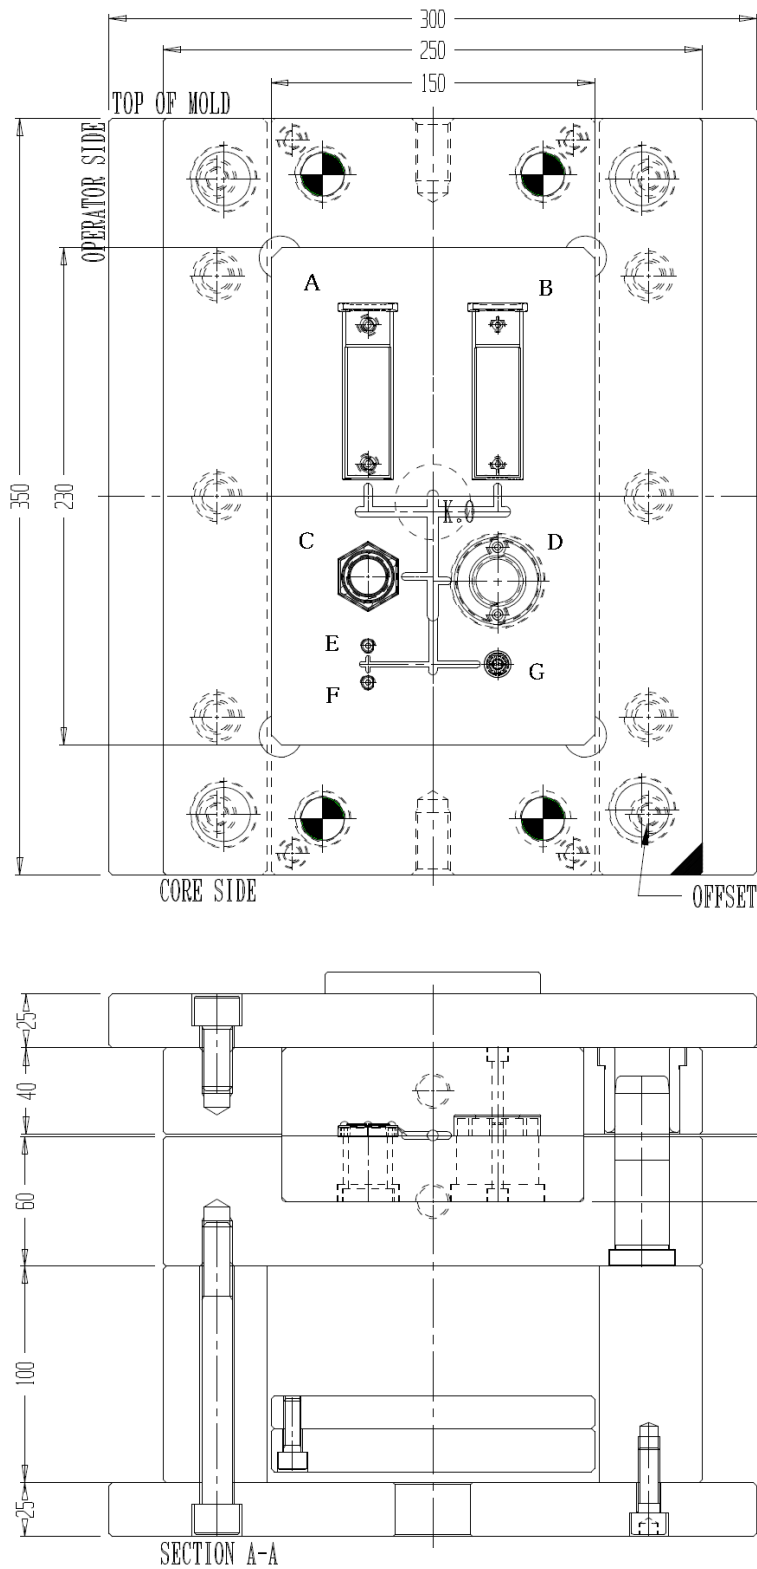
Mould assembly drawing generated by the ICMLDS prototype in case study I
